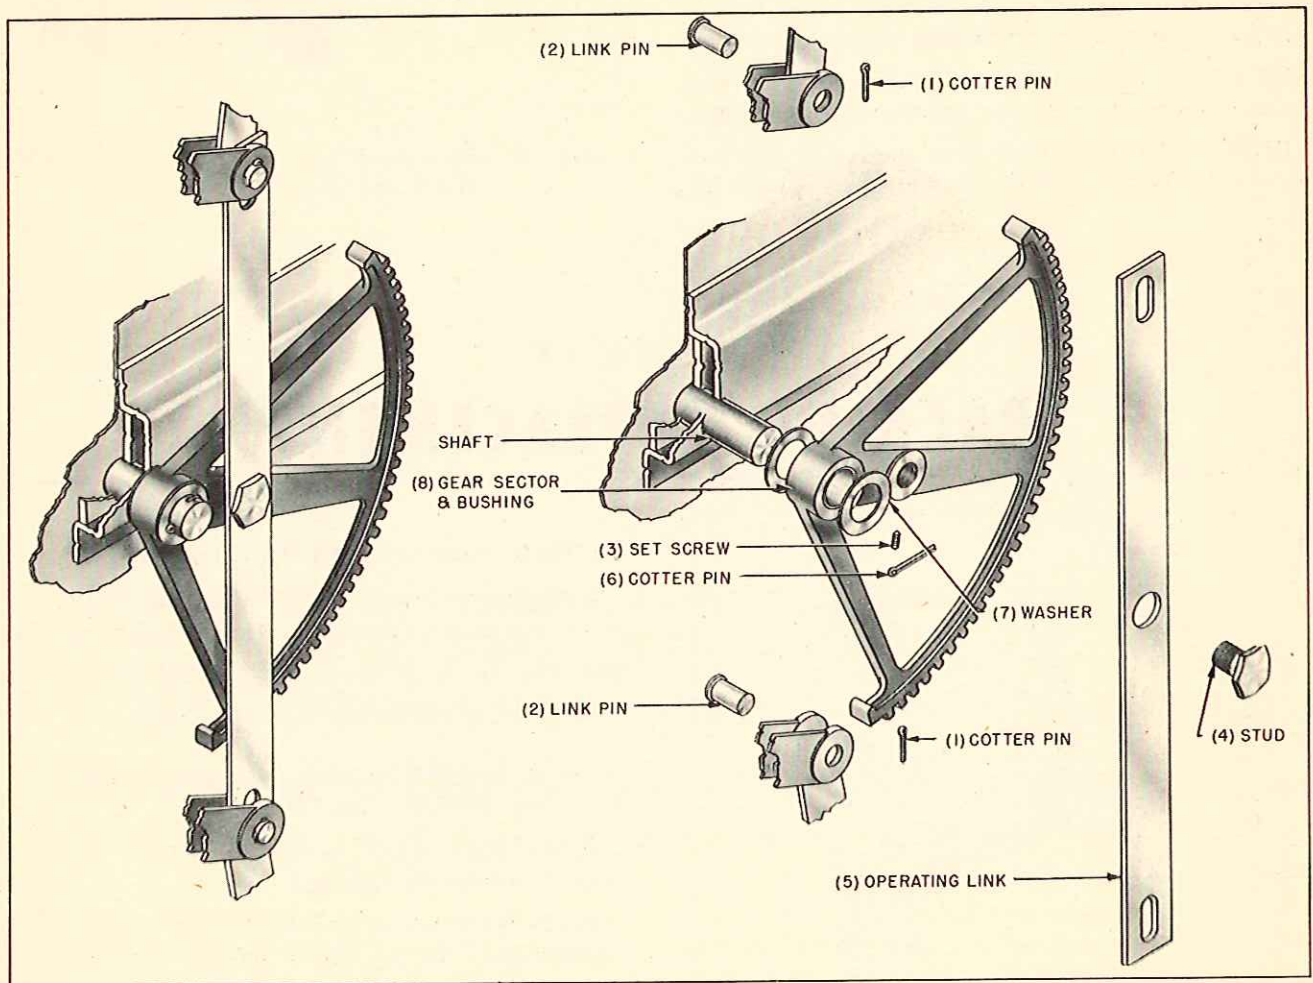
Gear sector (quadrant), assembly and exploded views, TLD-3(ms) door.
